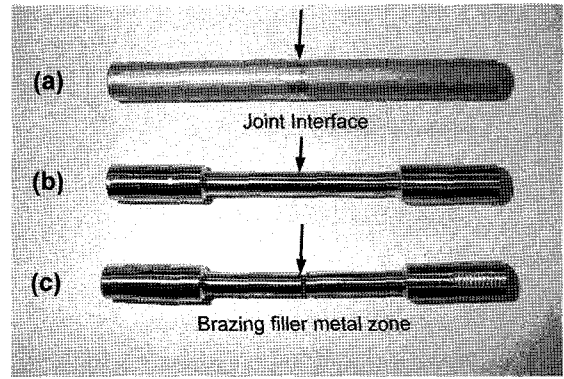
Photographs of test specimen. (a) joint made by vacuum brazing, (b) tensile test specimen, and (c) after tensile test. (fractured brazing filler metal zone)
